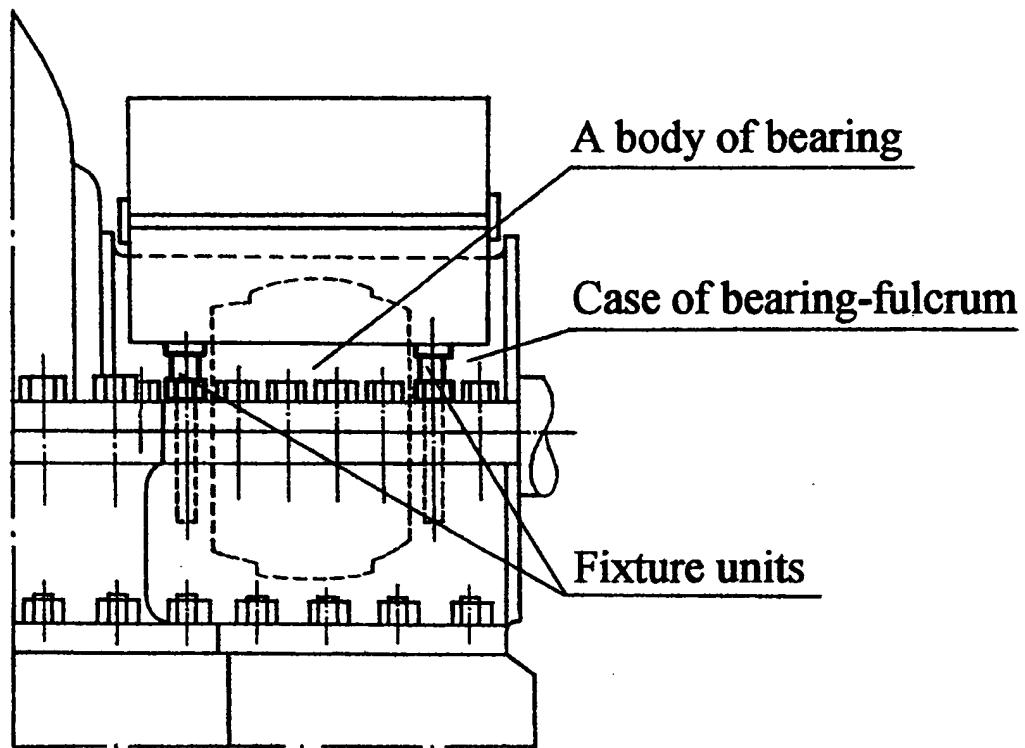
Preferable setting of fixture units of the B-F-L-Ws.
